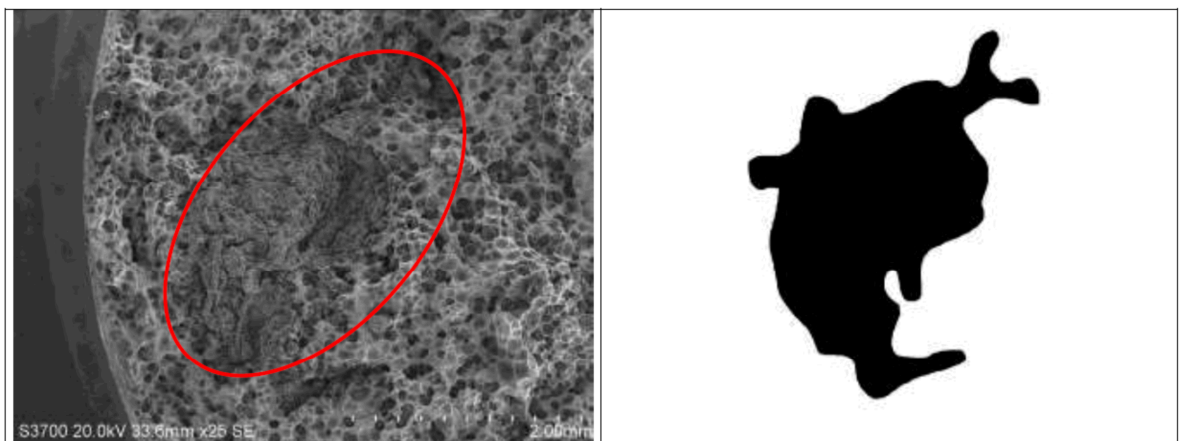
Medium size defect taken from tensile test specimen I56T [7].
